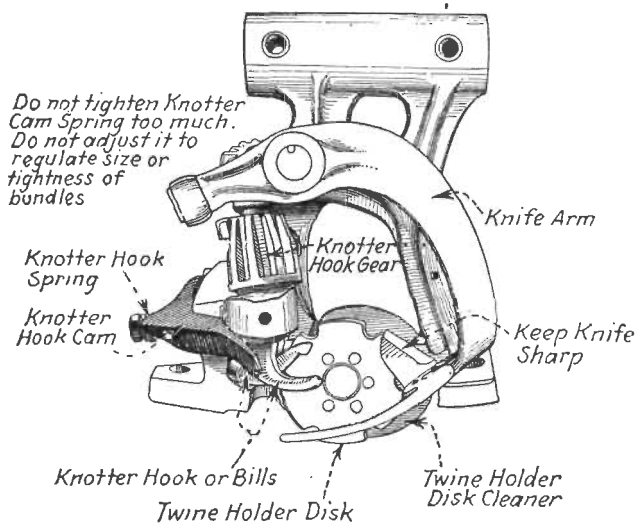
Knotter head showing bill hooks and bill-hook spring, twine holder, and knife arm.
